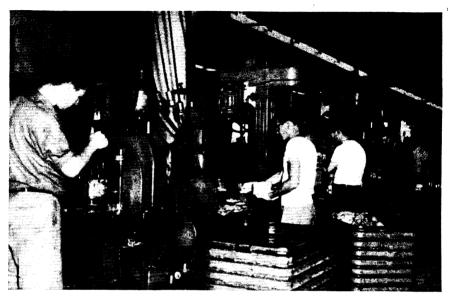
A section of a machining line for turning, tapping, and facing an oil-burner carburetor housing.
